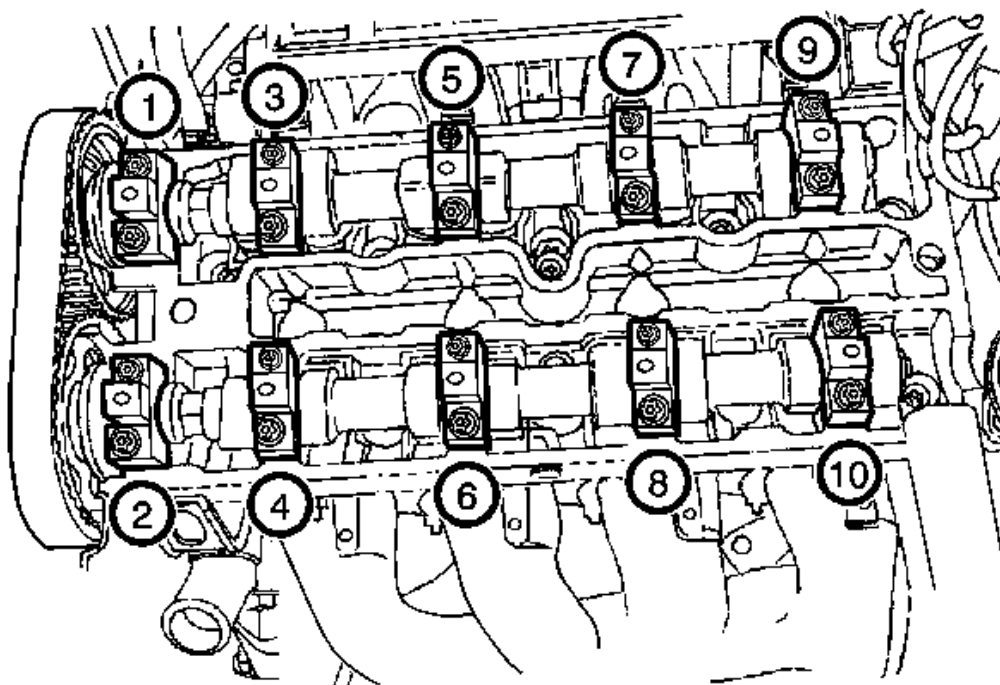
Identifying Camshaft Bearing Cap Bolt Installation Sequence
